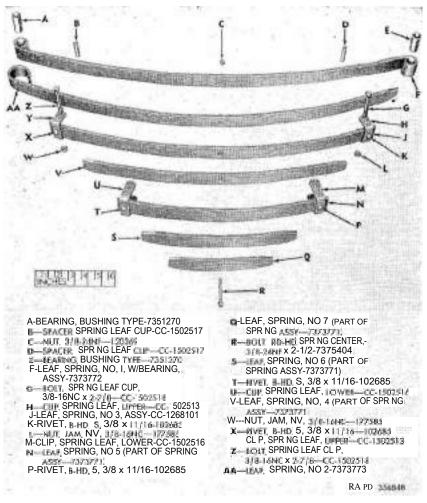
Front spring assembly—truck models M37, M42, and M43—exploded view.
